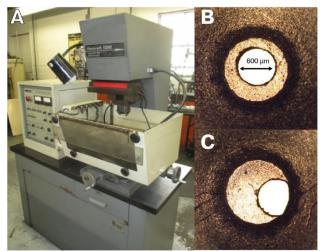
| Electric discharge machine for hole burning. (A) Electric discharge machine (EDM) in the Physics Machine Shop in Phillips Hall. (B) on-center hole burned via spark erosion using the EDM. (C) off-center hole that is not usable for the DAC but may be typical of trial-and-error alignment.
